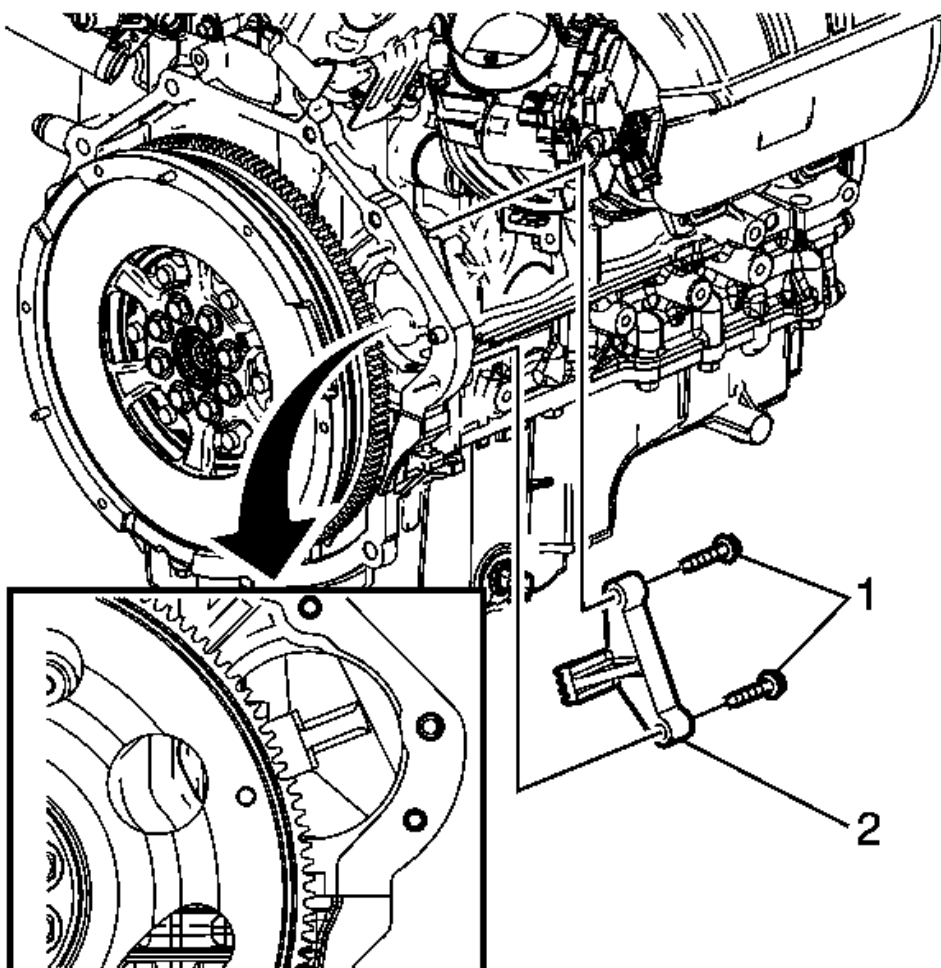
Flywheel Holding Tool & Starter Motor Bolts
